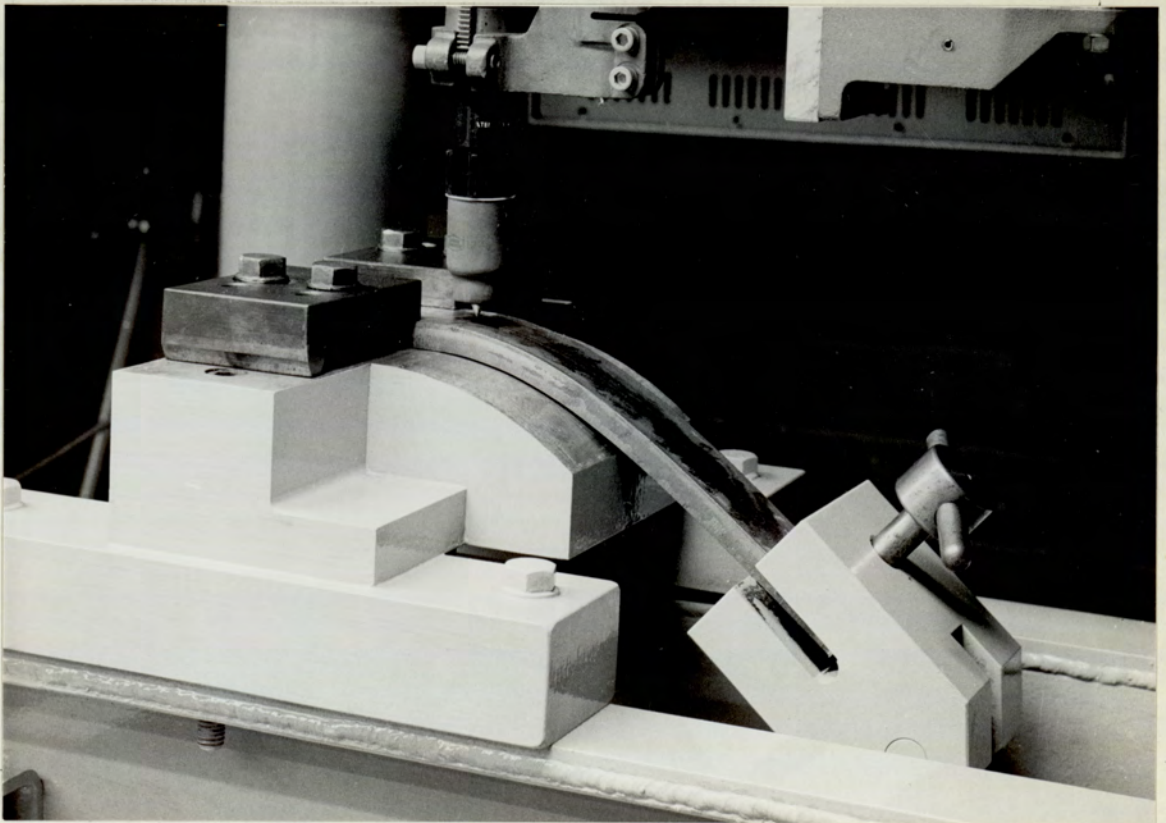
The Varestraint Test Apparatus used in the present investigations, shown at the completion of welding.
